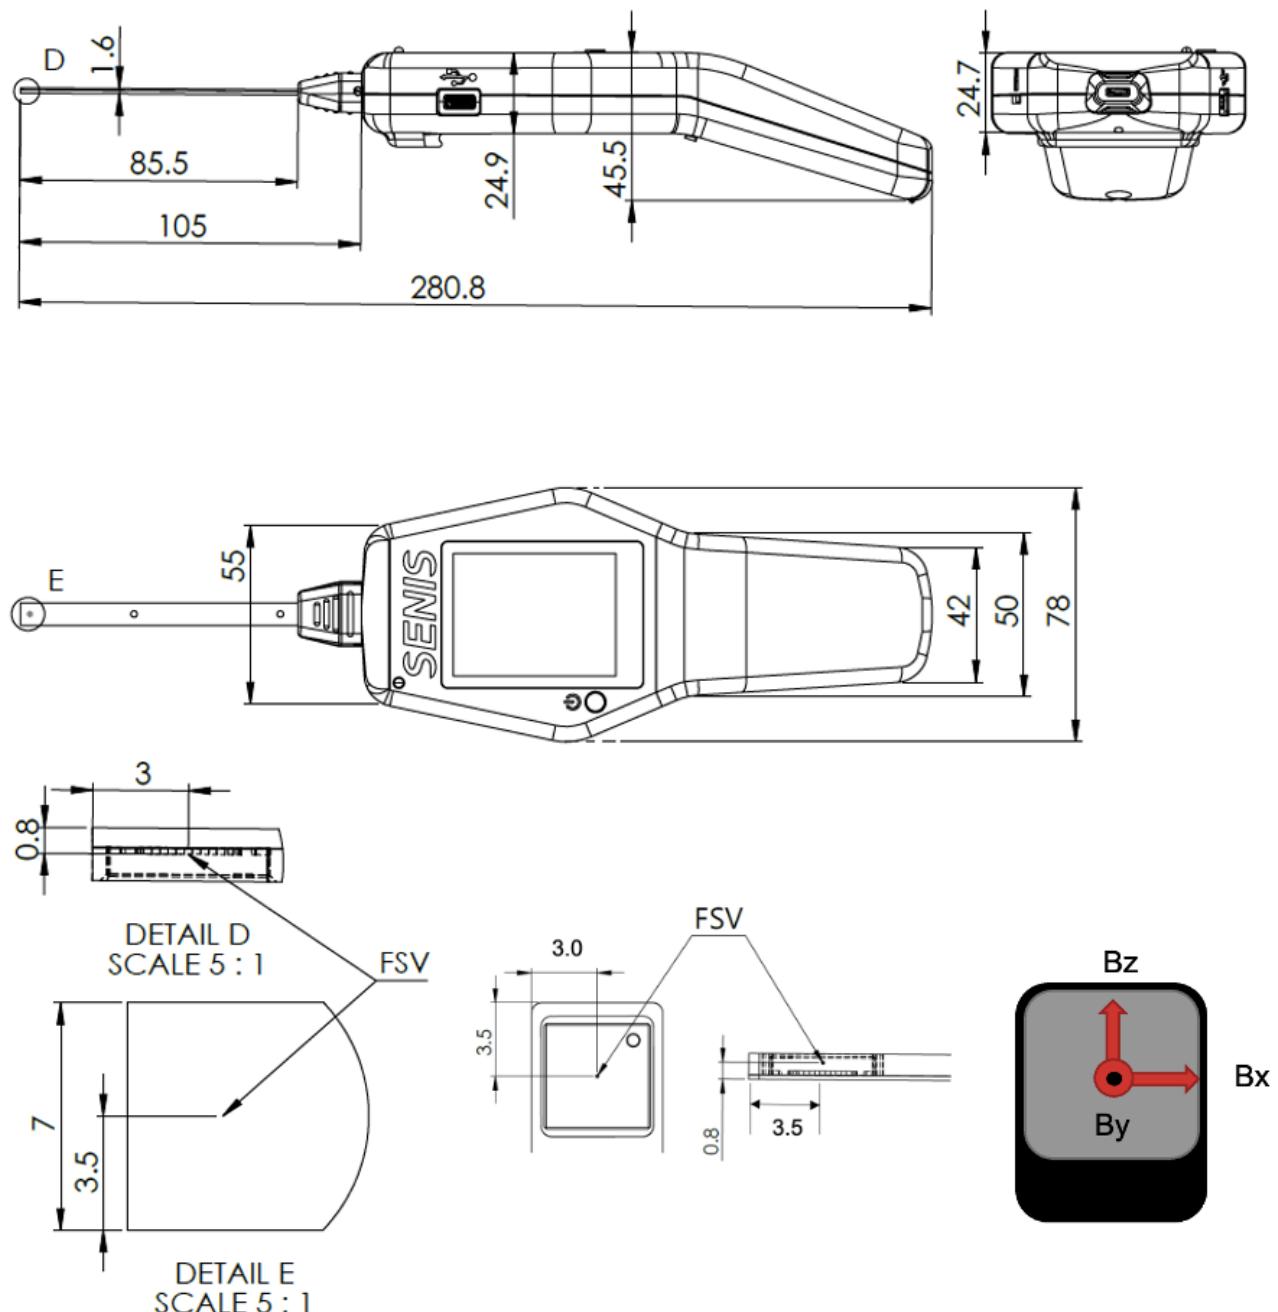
SENIS 3MH1-E Handheld Probe and the extension cable
